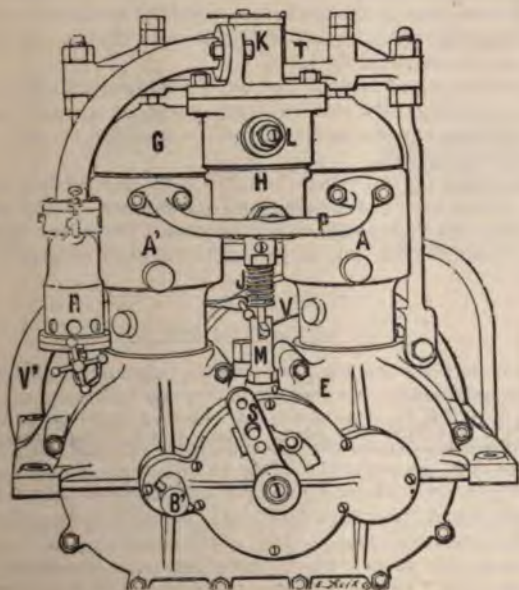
OUTSIDE VIEW OF MOTOR.
